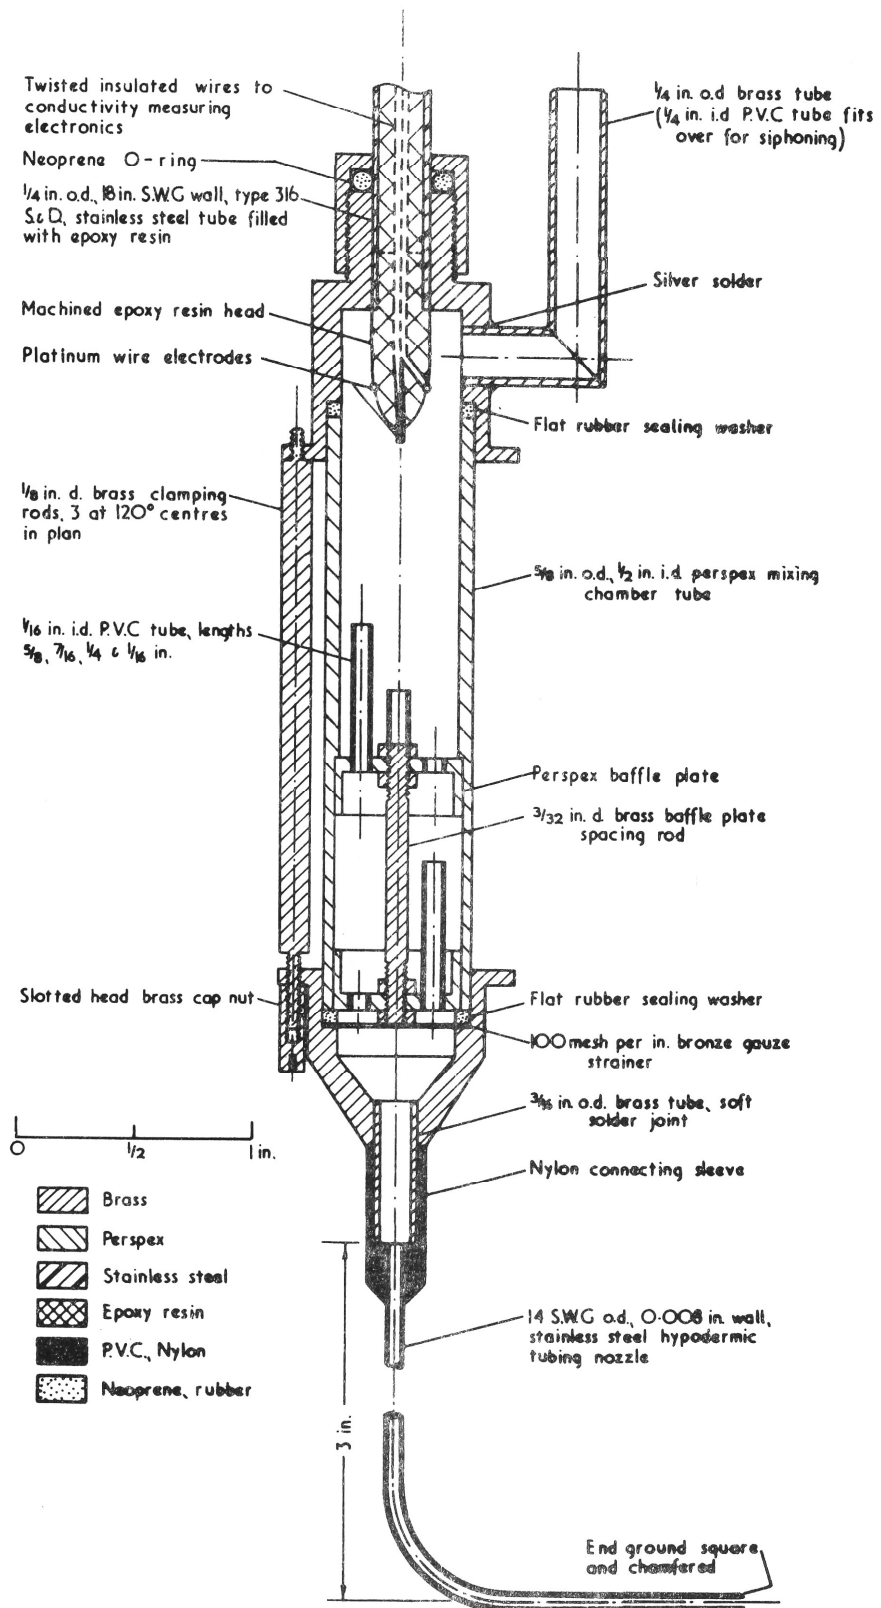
MIXING CHAMBER DETAILS : LONG. SECTION
